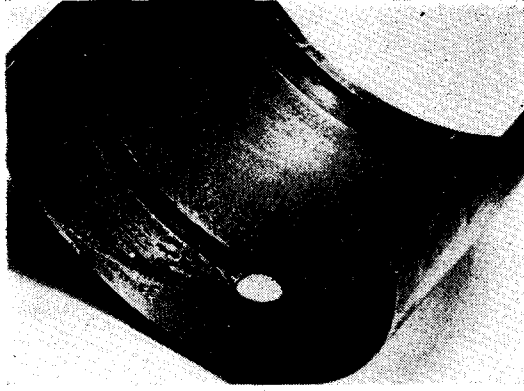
SURFACE EROSION BY OIL-BORNE PARTICULATE MATTER FLOWING FROM BEARING'S OIL SUPPLY HOLE
